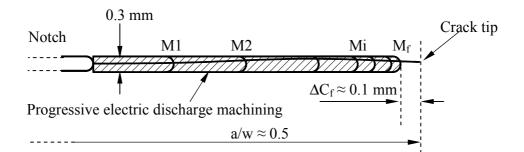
Electric discharge machining to produce residual plastic wake lengths on a pre-cracked CT specimen
